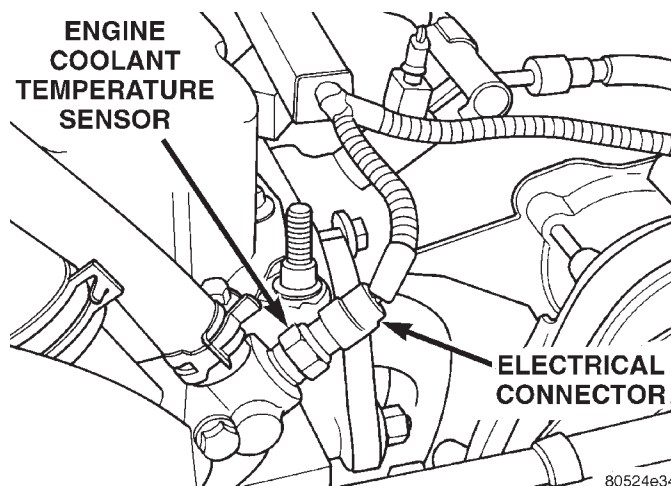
Engine Coolant Temperature Sensor—4.0L Engine
